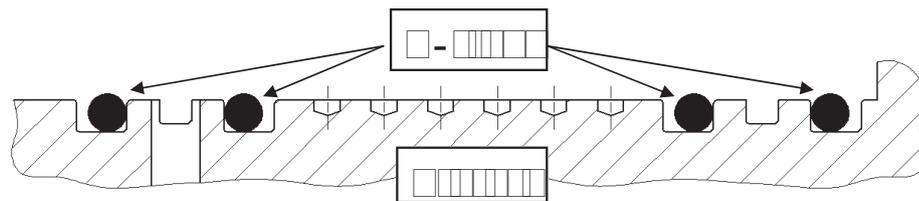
Geometry of fixture sealing grooves with fitted sealing.
